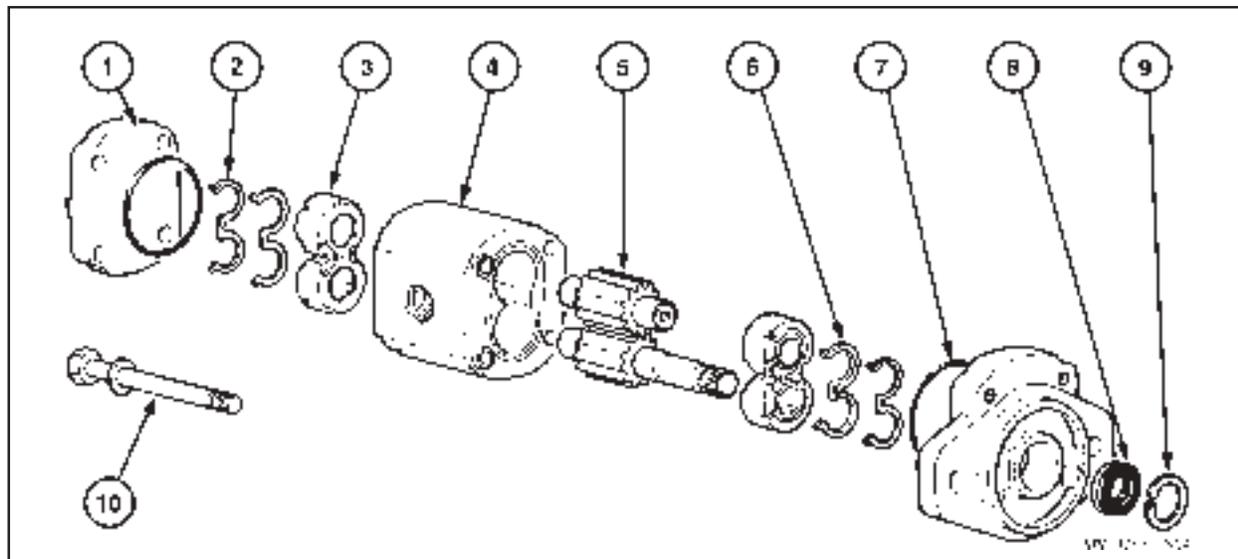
HYDRAULIC PUMP - EXPLODED VIEW
